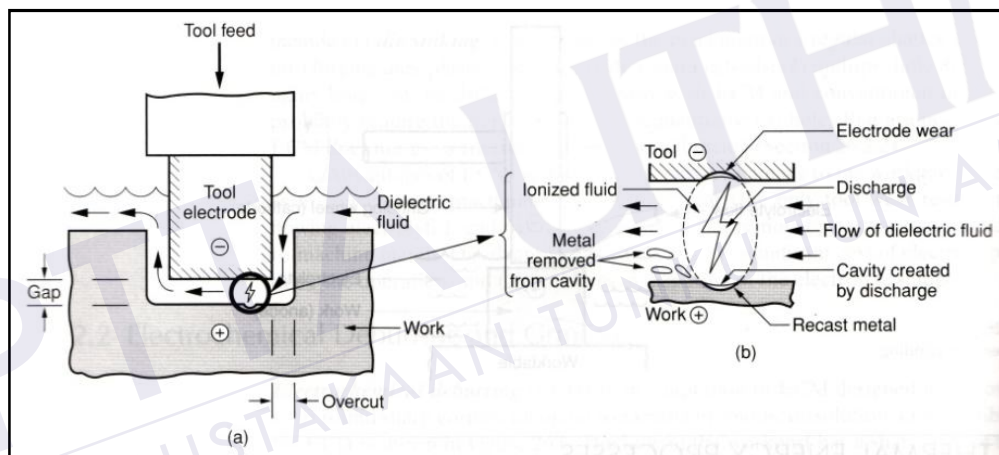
EDM machining process (a) machining setup and (b) close-up view of gap, showing discharge and metal removal (Groover, 2007).
